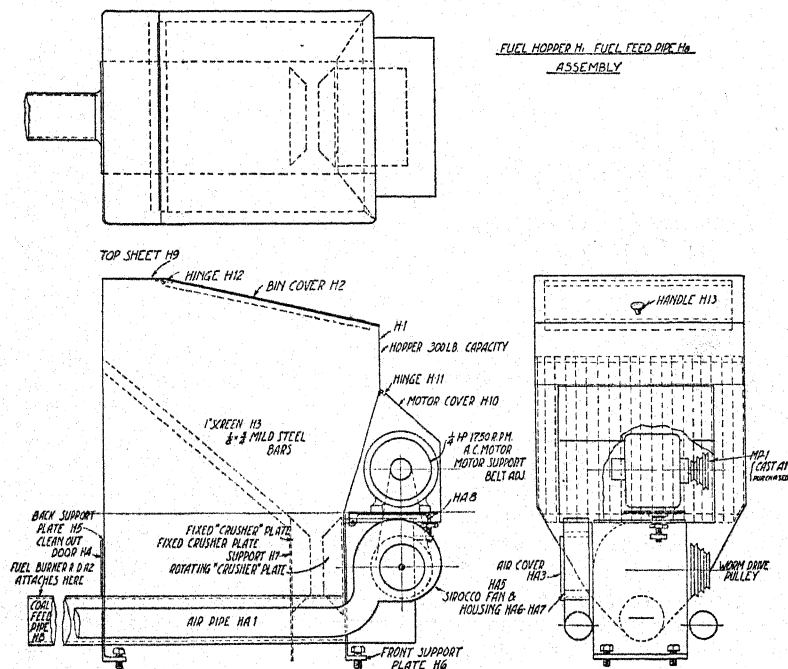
Assembly of stoker except for burner which is shown in Fig. 2.
